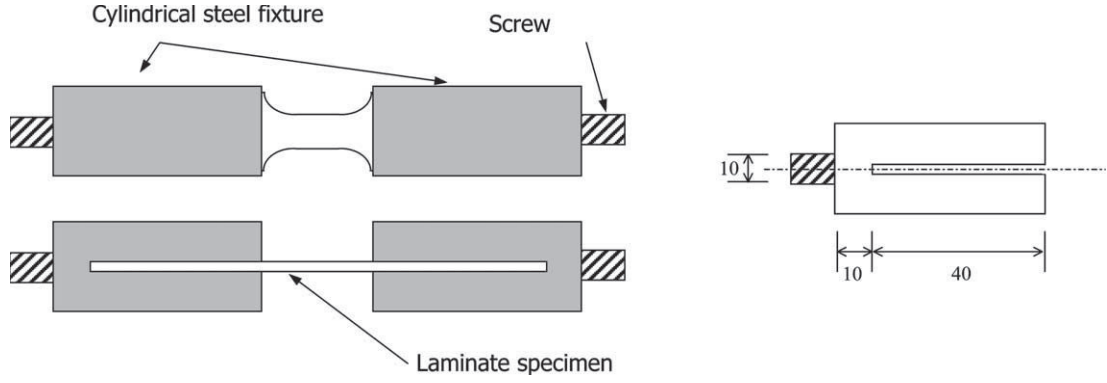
Assembly of the fixture and specimen (lengths in mm).
